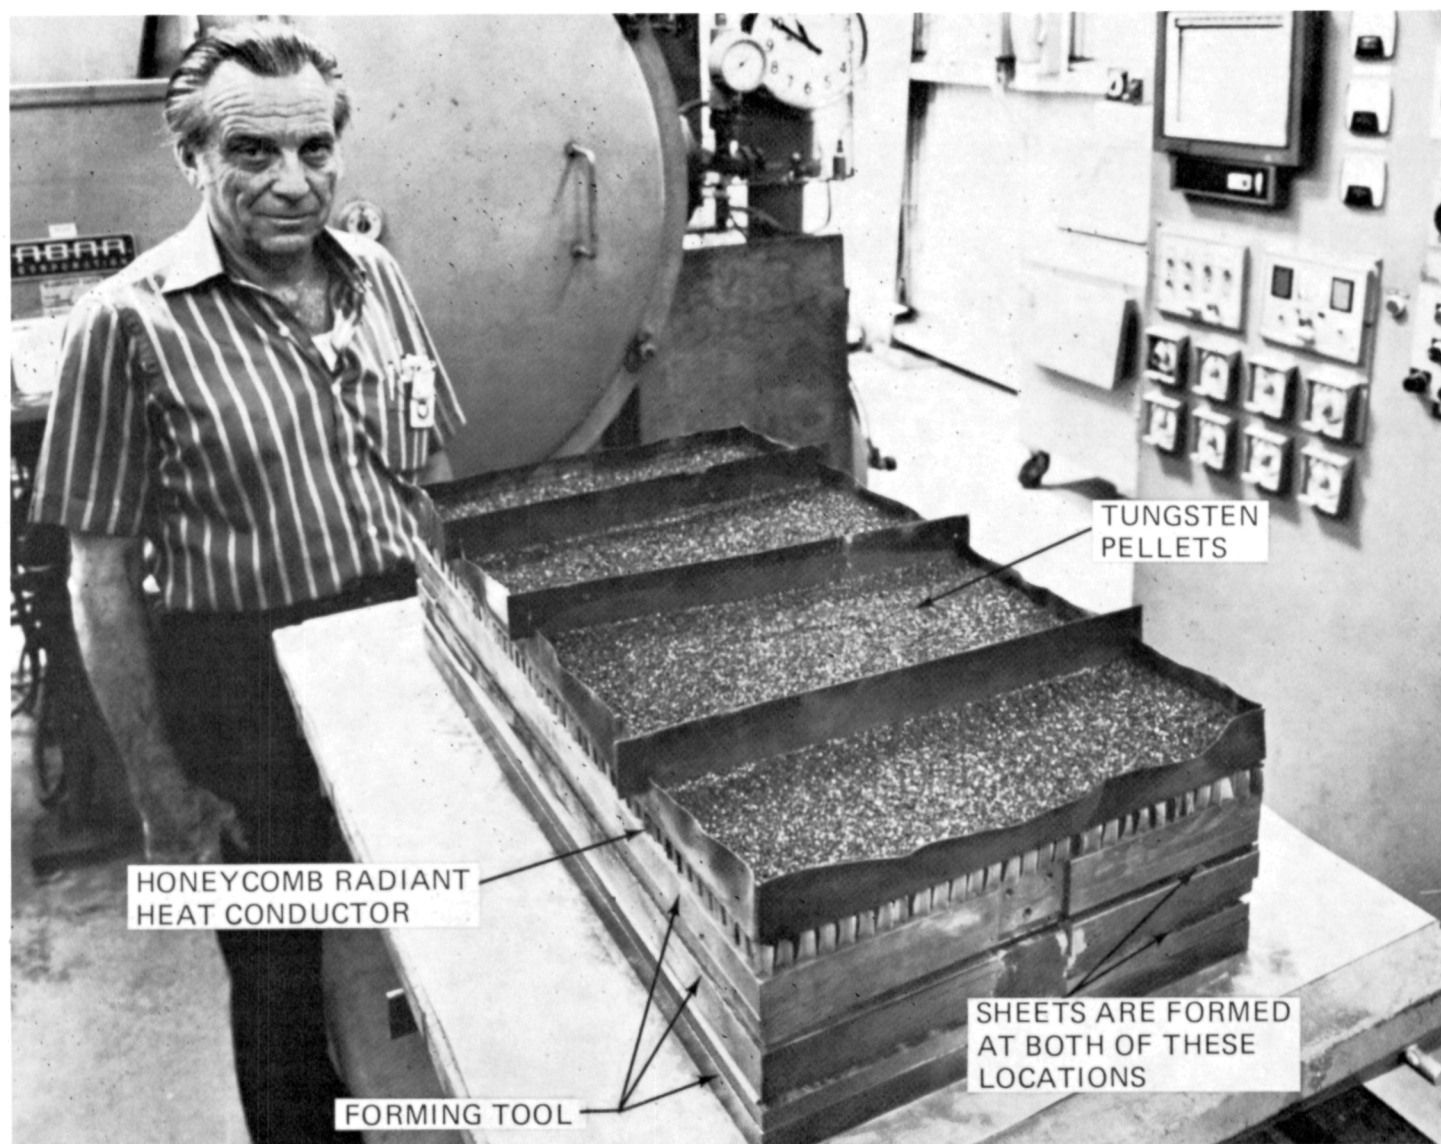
Superplastic Form Tool Ready for Loading into Vacuum Furnace
